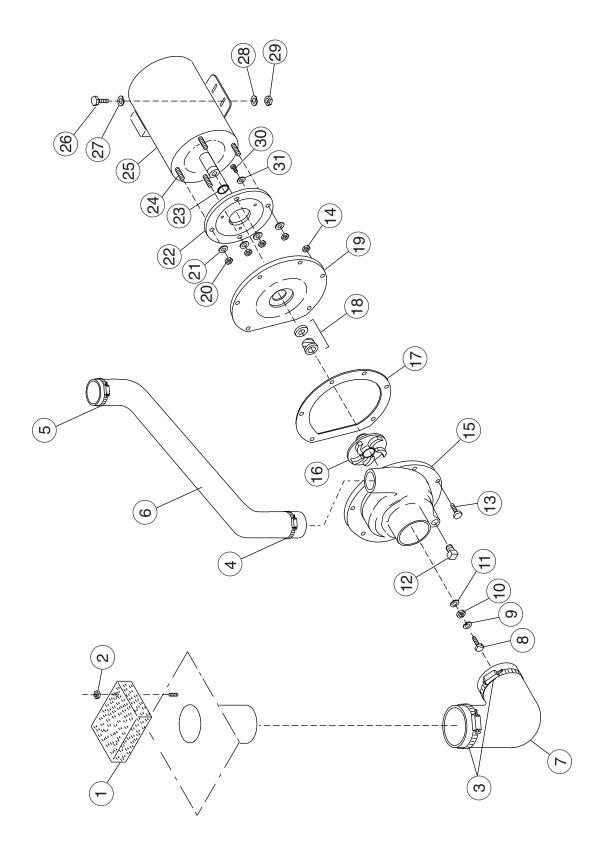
D-HB/D-H1/D-LF Pump Assembly
